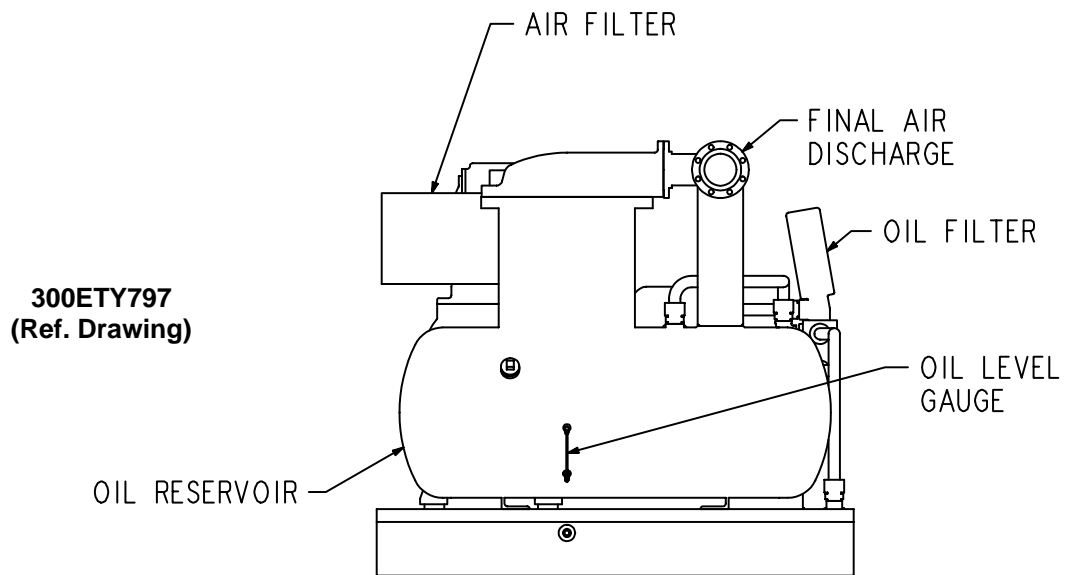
AIR COOLED UNIT – LESS ENCLOSURE – OIL RESERVOIR END
